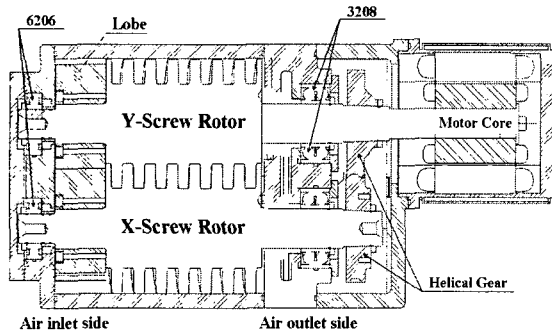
Schematic drawing of screw rotors of the hybrid dry vacuum pump
